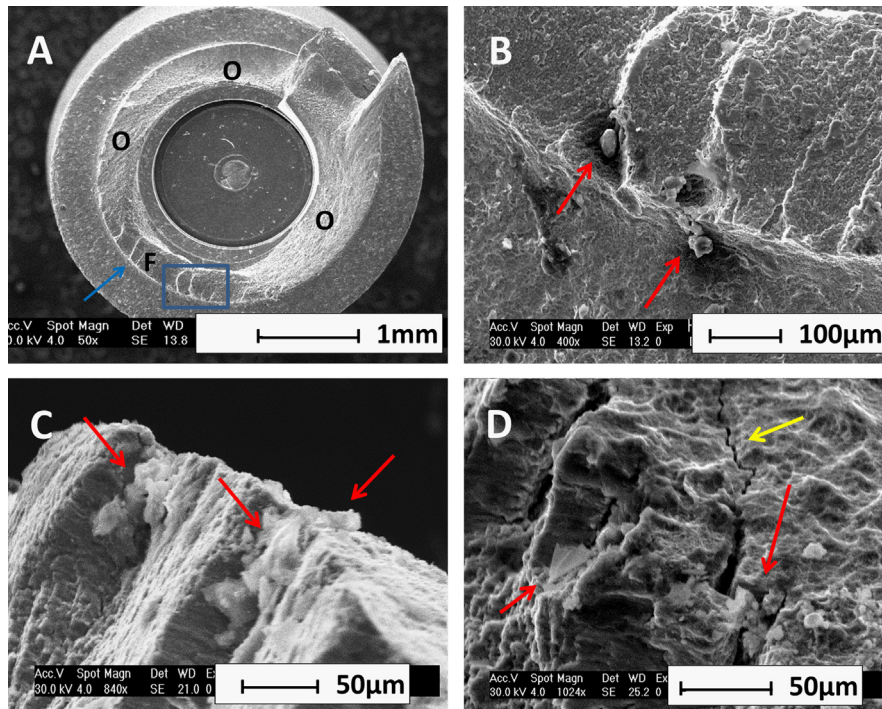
Fracture surface of fatigue tested implant after final fracture. A: The fracture surface with flat part caused by fatigue failure mechanism marked by the letter “F” with crack initiation location (Blue arrow) and rough part marked by the letter “O” B: Upper view of crack initiation location – the macrograph is an enlargement of the area marked by a blue square on A with embedded particles marked by red arrows C: Side view of crack initiation location with embedded particles marked by red arrows. D: Side view: secondary cracks, marked by yellow arrows, on the lateral view, at the vicinity of the fracture surface with embedded particles along the crack, marked by red arrow. (For interpretation of the references to color in this figure legend, the reader is referred to the web version of this article).
